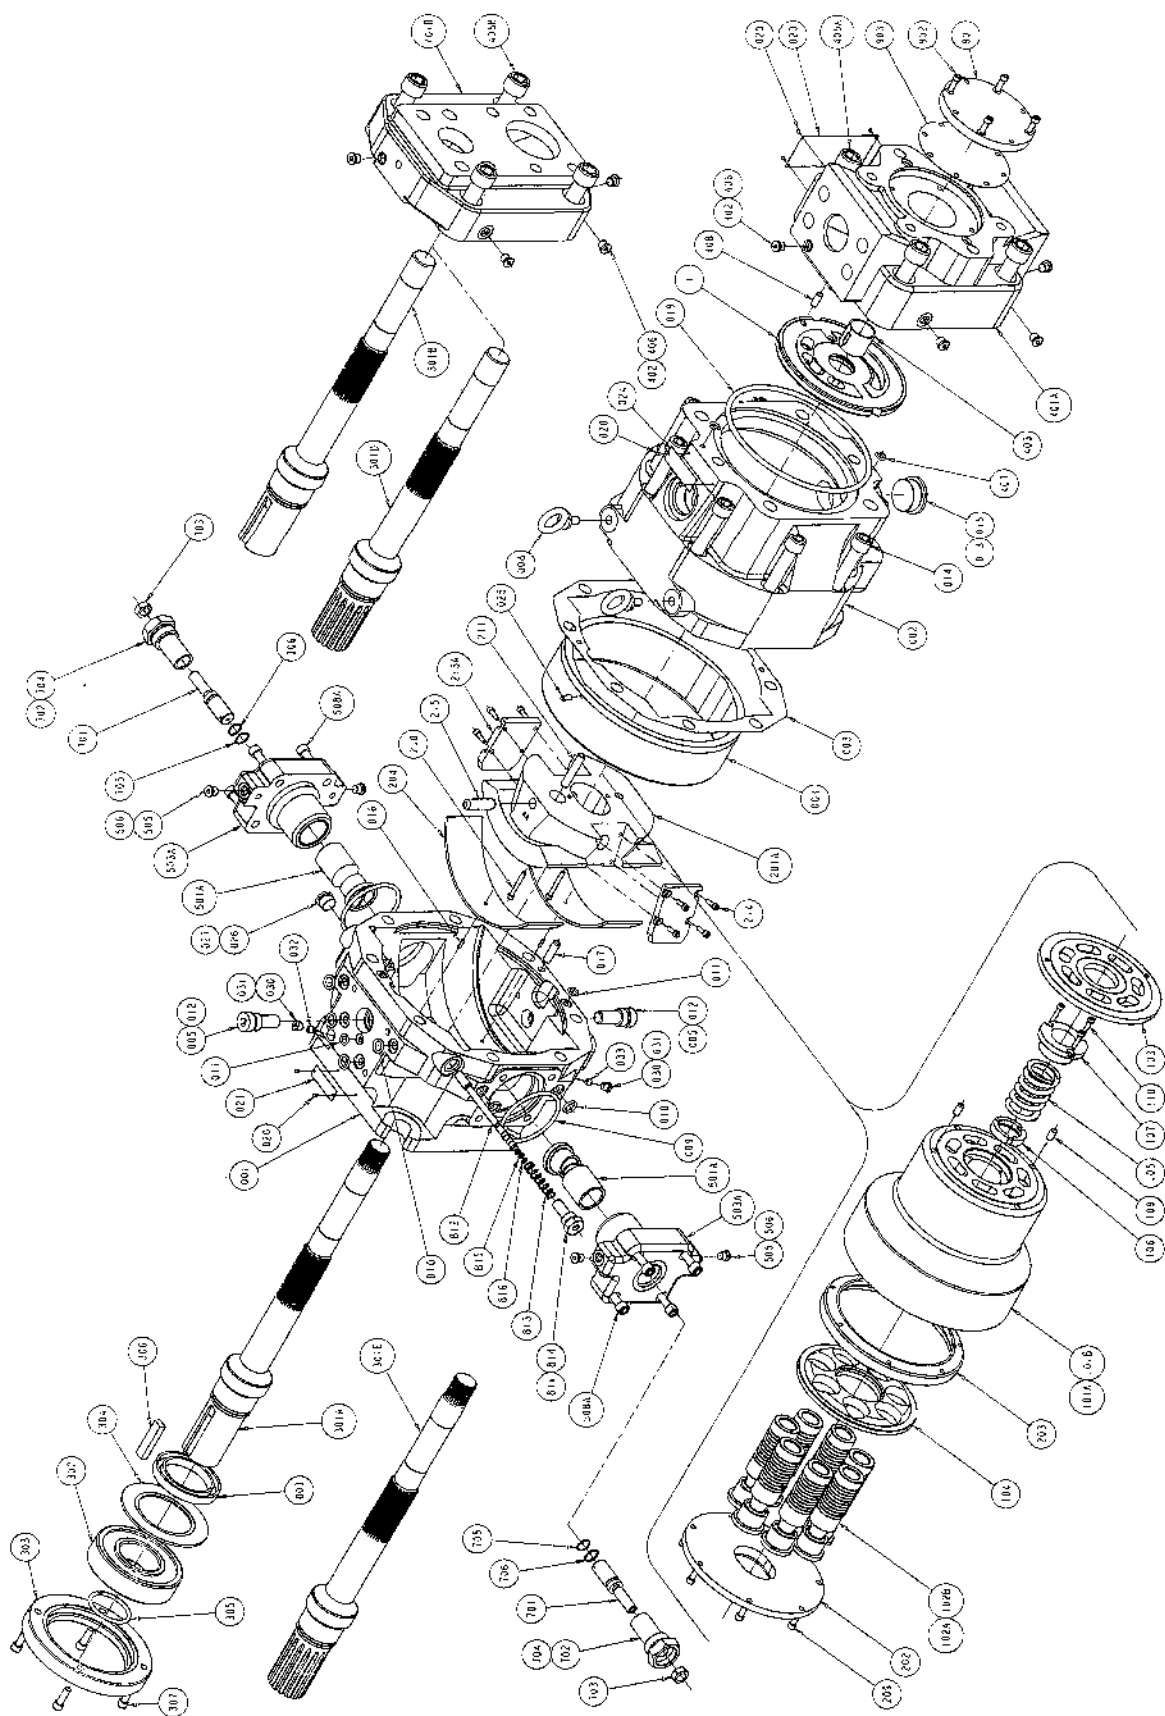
Exploded Parts Drawing (517925) sheet 2.
